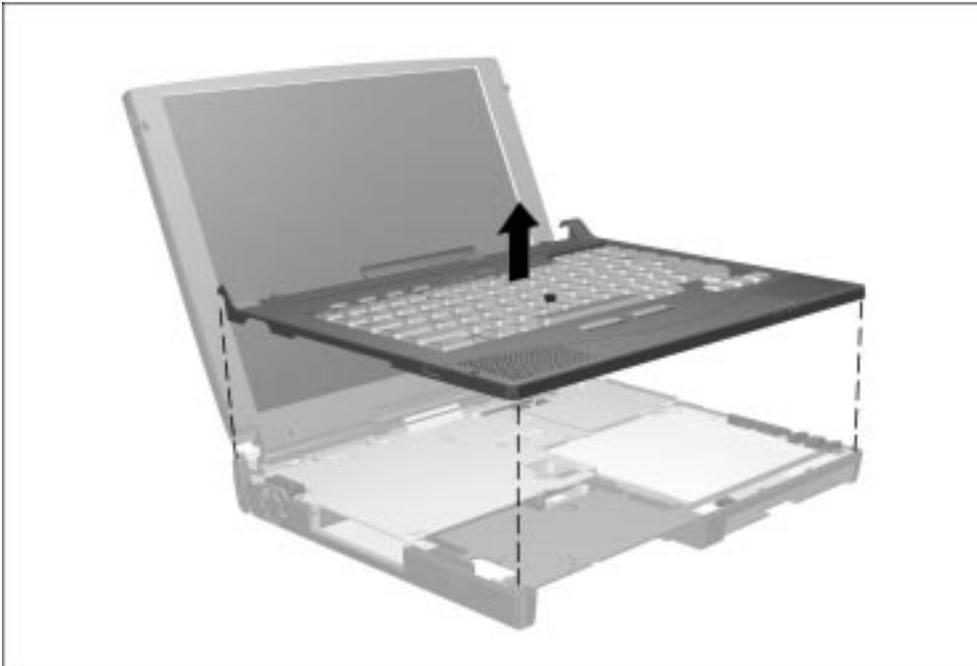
Removing the Keyboard/CPU Cover Assembly
